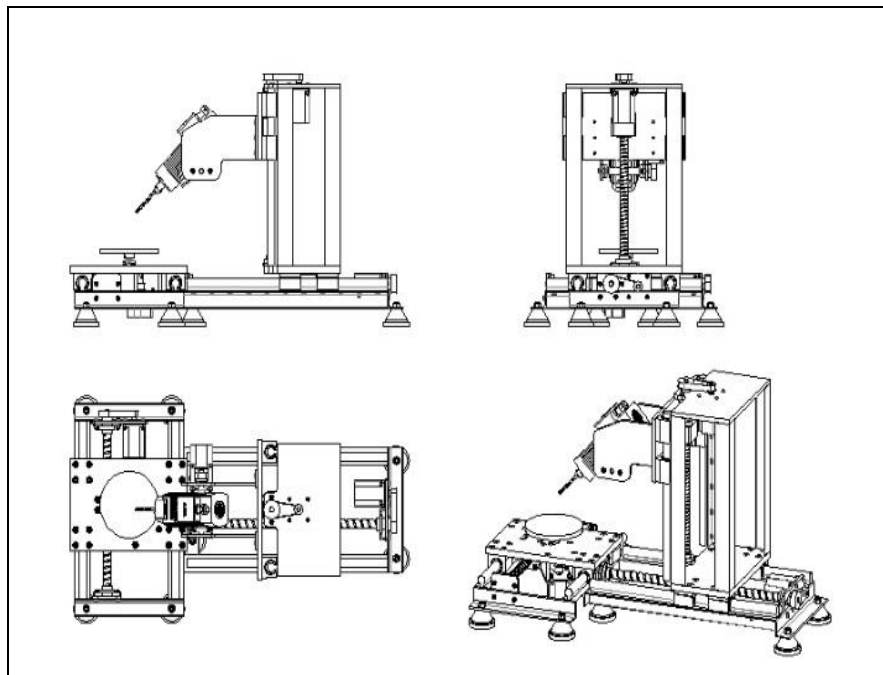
Front, Top, Side, and Isometric view of the machine.
